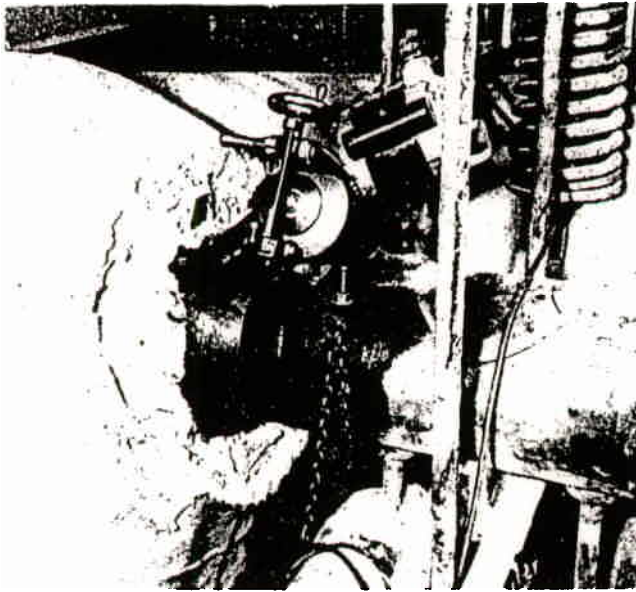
"Weld-prober" saw in operation removing boat-shaped slice from main steam piping joint for laboratory evaluation
